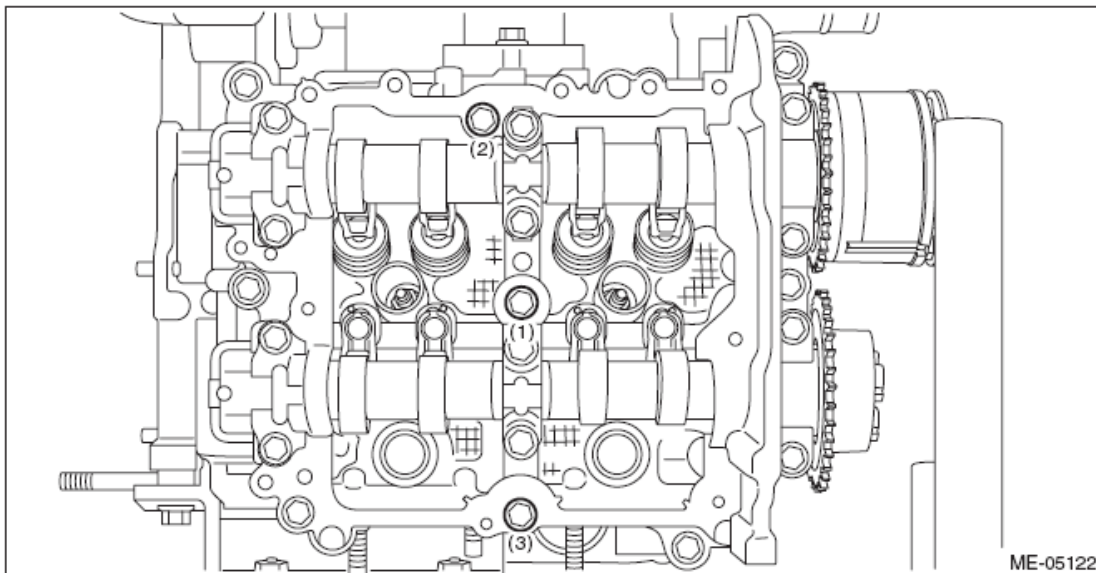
Identifying Cam Carrier Bolts Tightening Sequence
